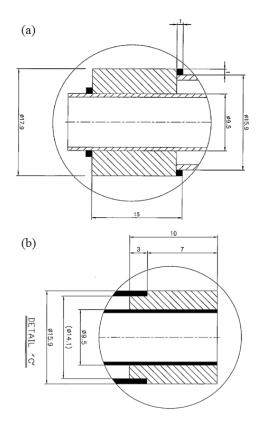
Design of the end plug: (a) conventional and general for welding, and (b) modified to increase the weldability and machinability.
